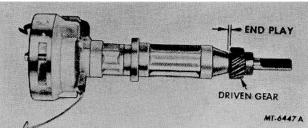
Checking Distributor Shaft End Play (Housing-to-Drive Gear Clearance) (Typical)
